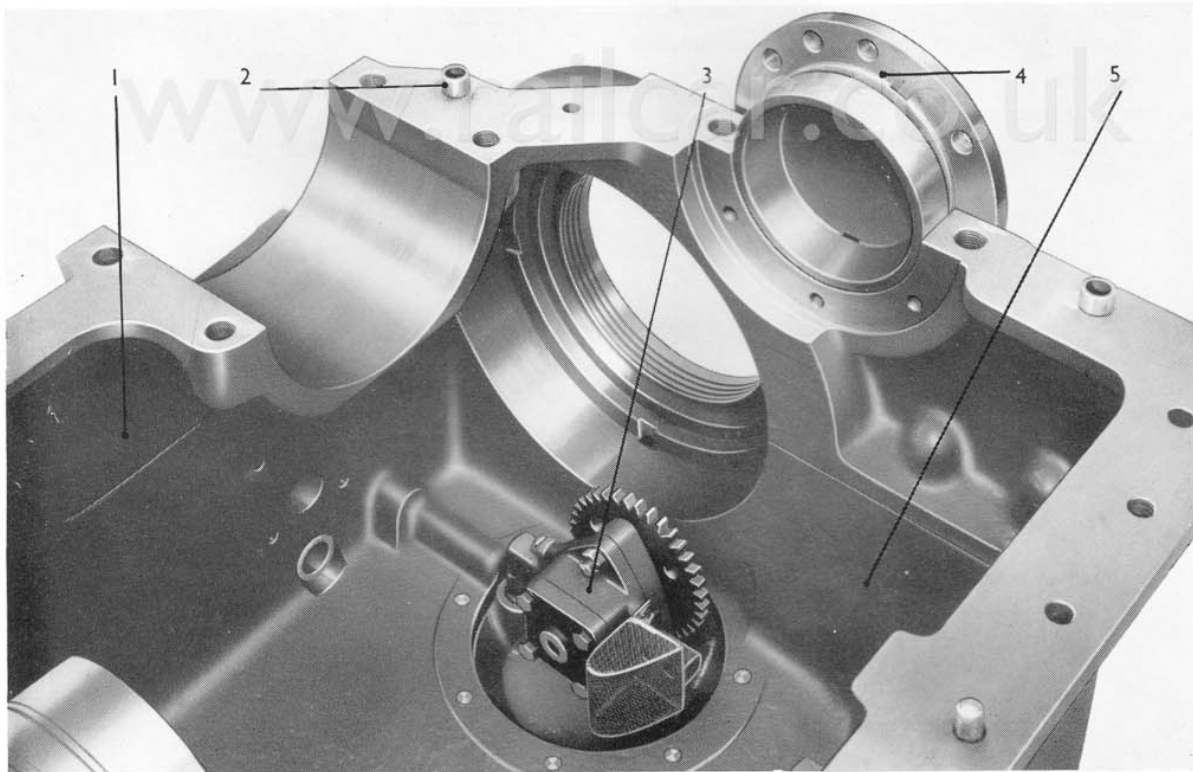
VIEW OF OIL PUMP LOCATED IN BOTTOM PORTION OF GEARCASE
